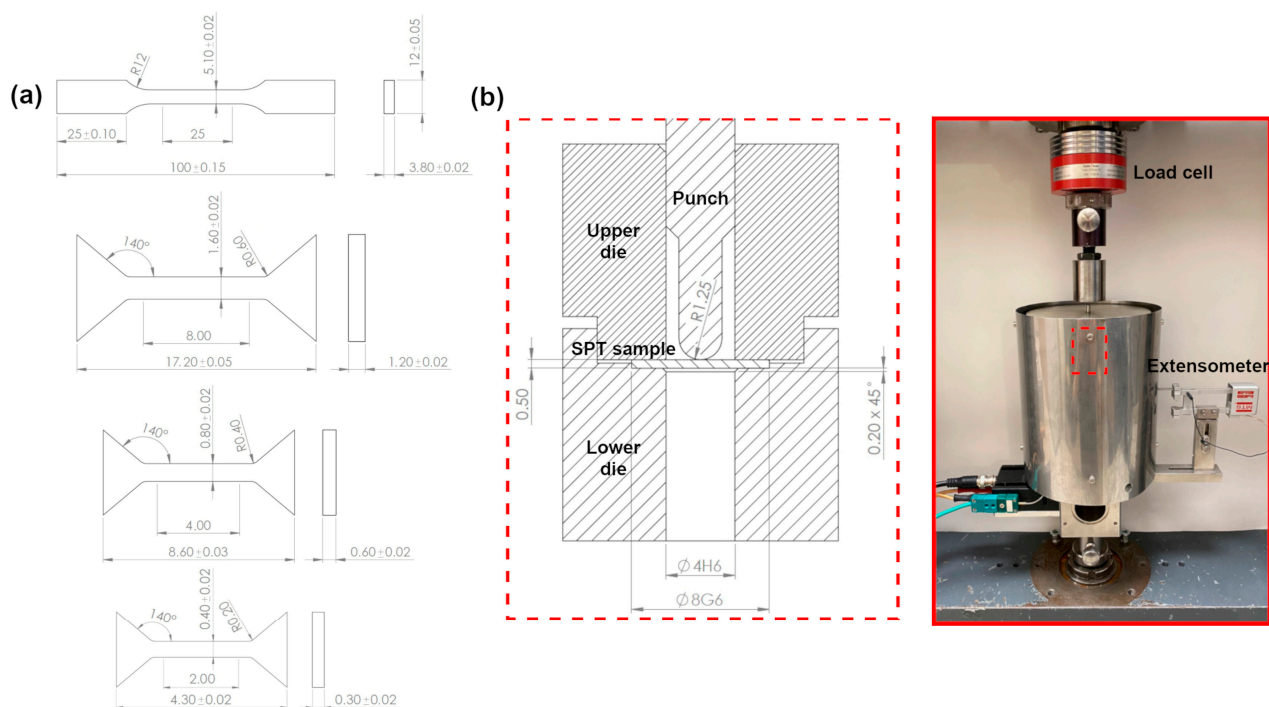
(a) Technical drawings of flat standard and miniaturized tensile samples and (b) schematic and general view of the SPT experimental setup.
